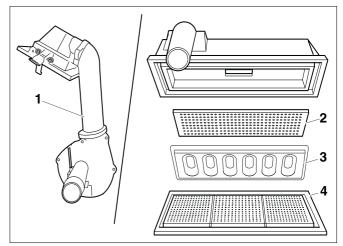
Cleaning the burner cover, gas/air distributor plate, orifice plate and burner
